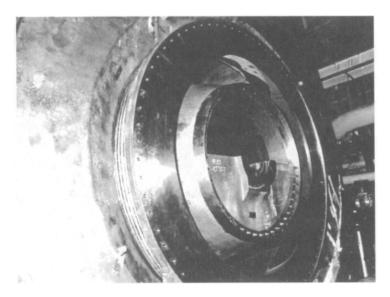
The exhaust casing fabrication is stainless steel. In this picture, the bearing housing can be seen in the center of the casing. The inboard (diffuser) end of the inlet casing will be bolted to the exhaust casing bellows.
